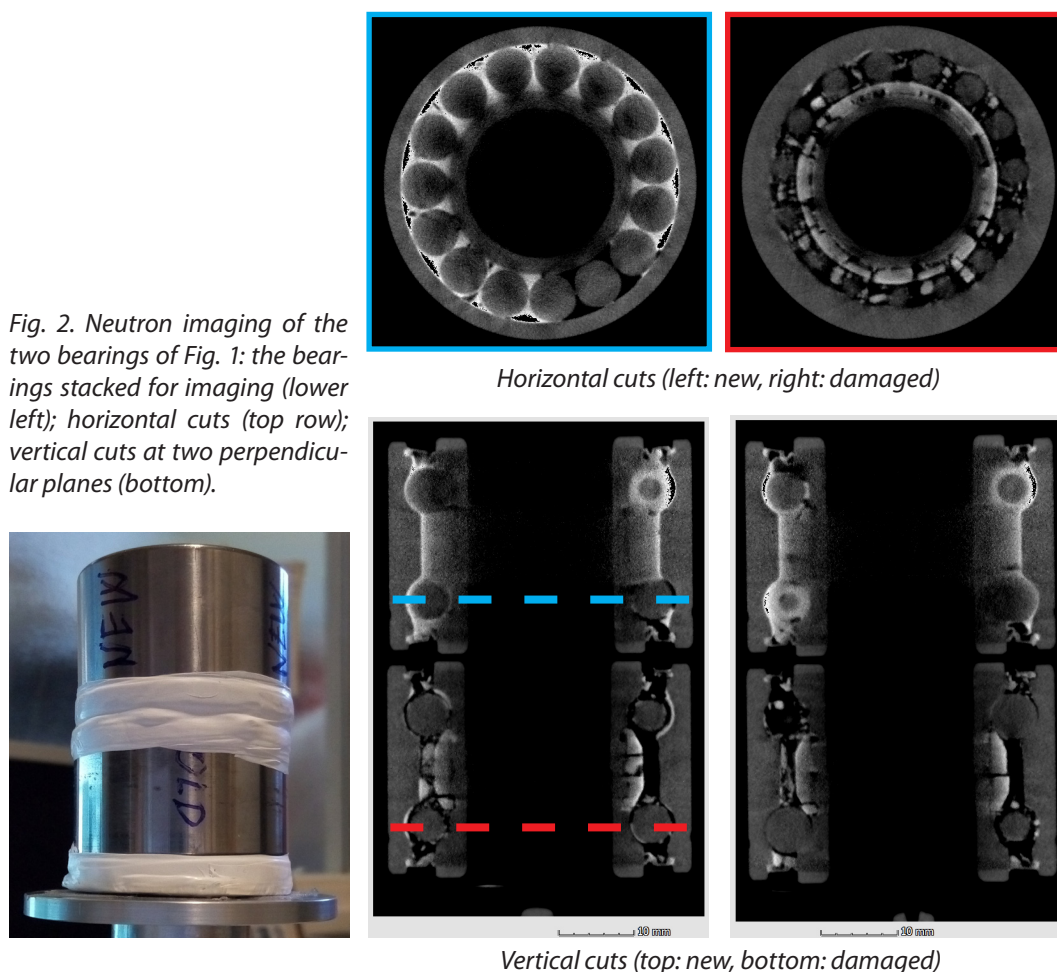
Neutron imaging of the two bearings of Fig. 1: the bearings stacked for imaging (lower left); horizontal cuts (top row); vertical cuts at two perpendicular planes (bottom).
